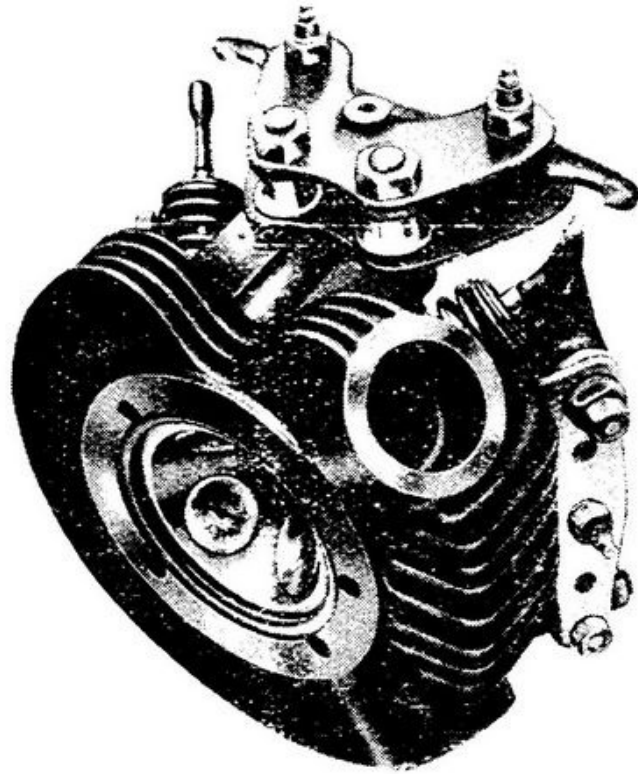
ROCKER GEAR, 250 C.C. AND 350 C.C.
